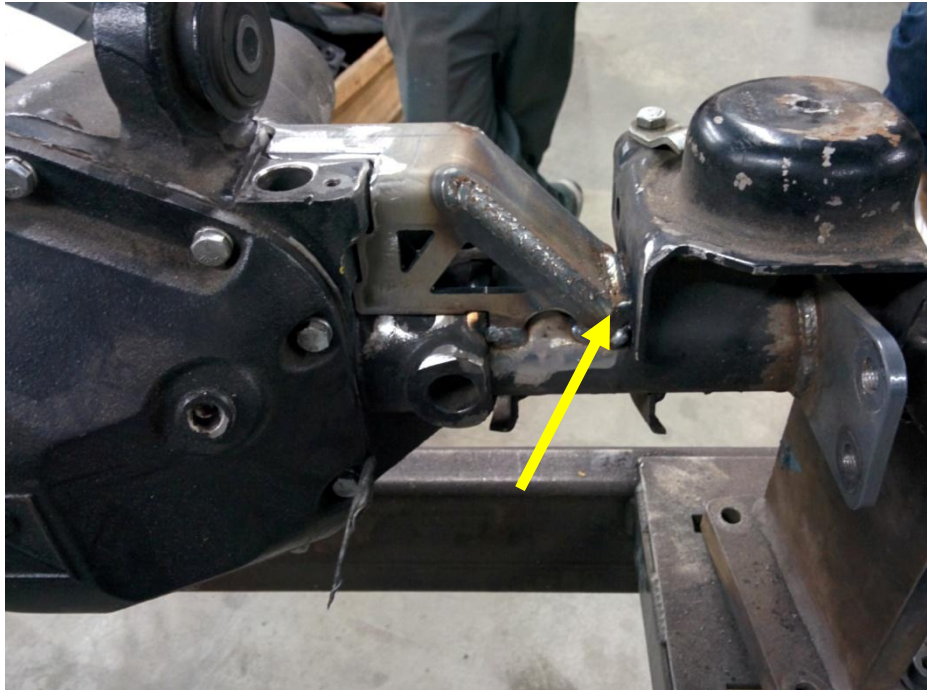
Center Plate Tops Welded to Truss
